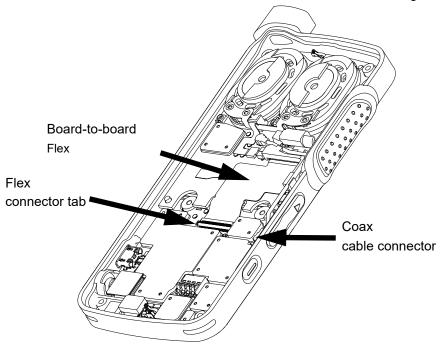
Board-to-board flex and coax cable connector disassembly
